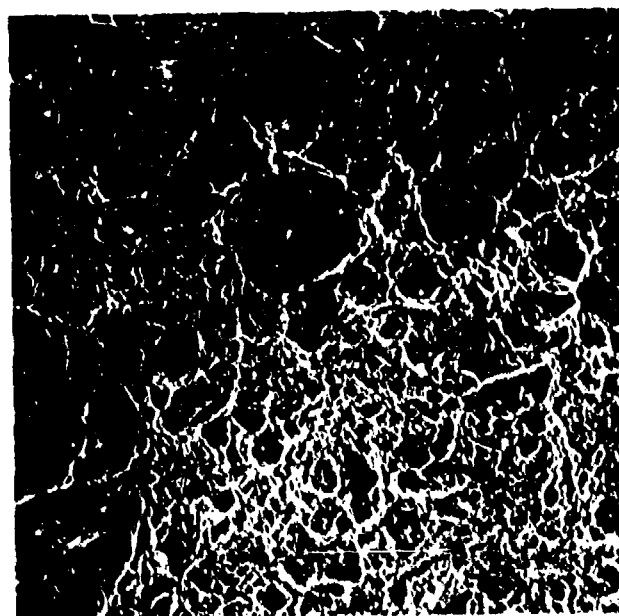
Tensile overload region in a temper-embrittled A-514 weld fatigue specimen, 750x.
